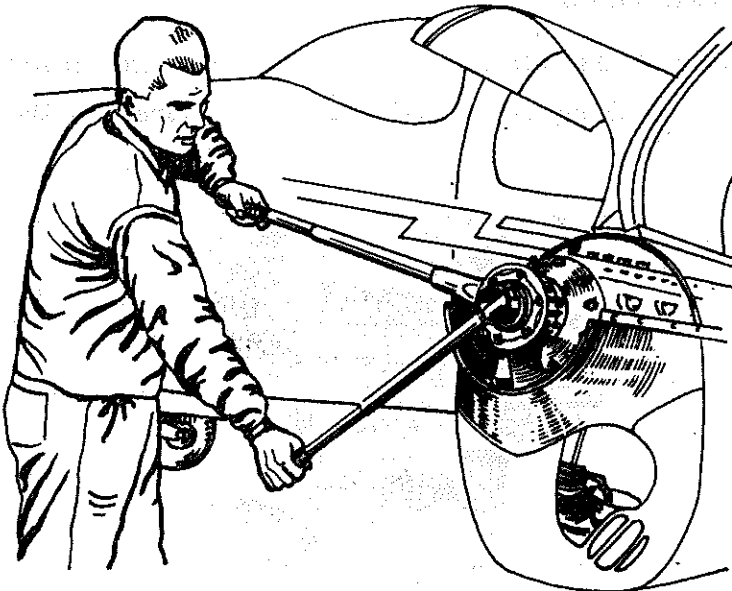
Tightening the power oil distributor rotor onto the engine crankshaft
